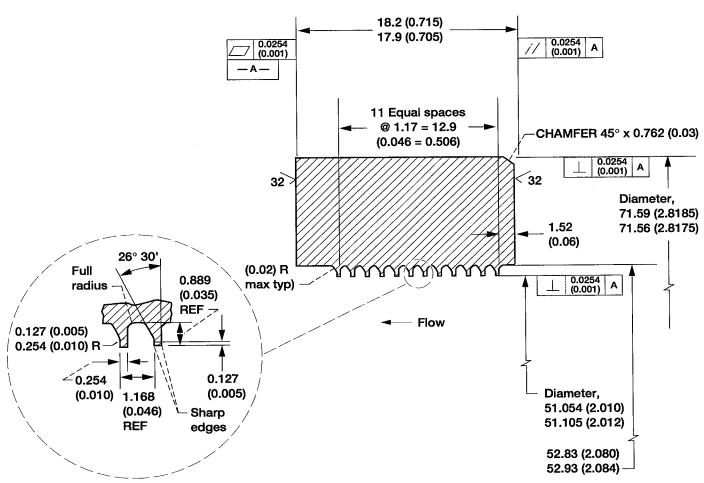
Labyrinth seal geometry; material, Inconel 718. Dimensions in mm (in.).
